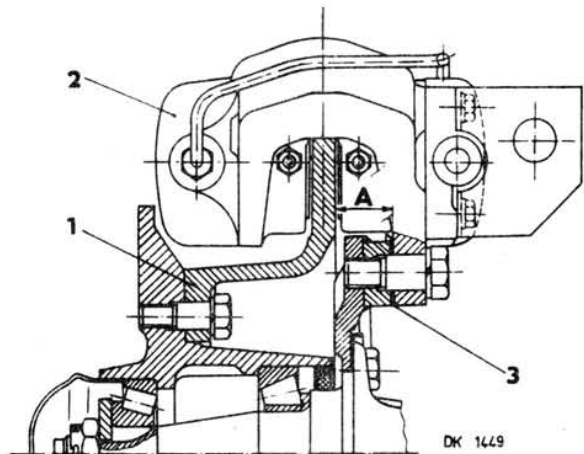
/1 - Front Wheel Brake Mechanism and Mounting (setting) Dimensions
